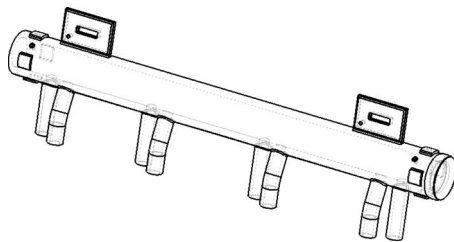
Trimetric view of the HPSH upper outlet manifold
